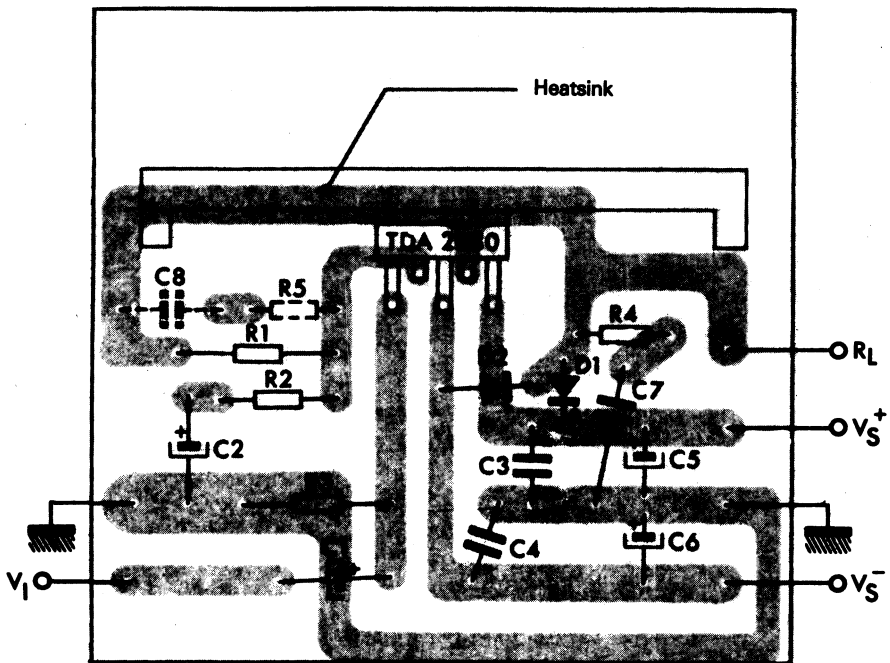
P.C. BOARD AND COMPONENT LAYOUT FOR
